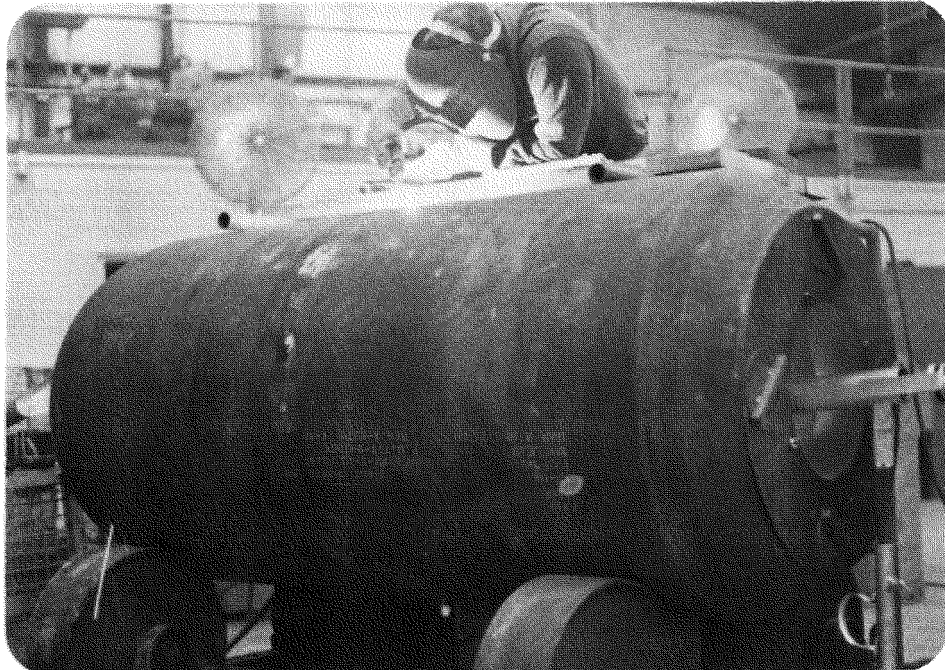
Arc-Air Gouging of the Vessel Weld Cavity
